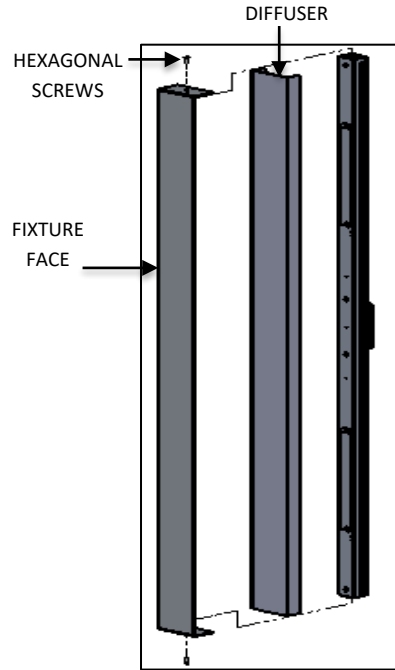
FIXTURE FACE DIS-ASSEMBLY
